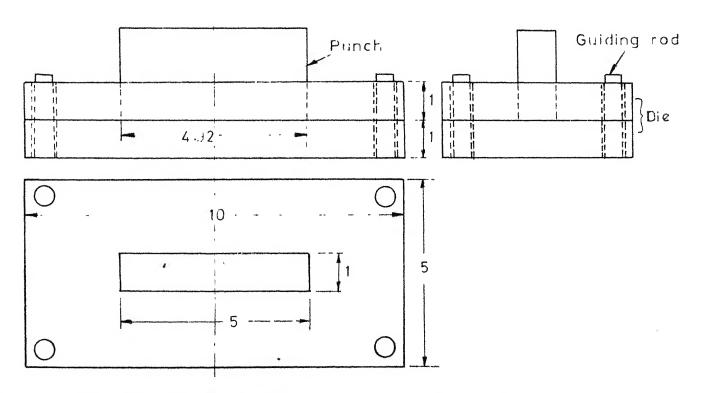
DESIGN OF THE MOULD ASSEMBLY USED FOR PRESSING.
